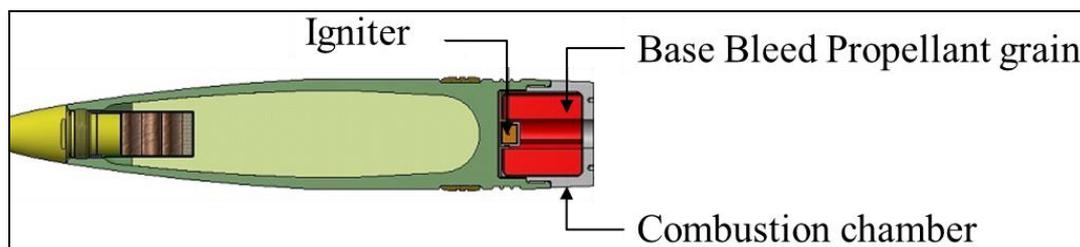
Example of an ammunition with a Base Bleed system assembled in the rear part. Consisting of a combustion chamber with a propellant grain and a pyrotechnic igniter inside.
